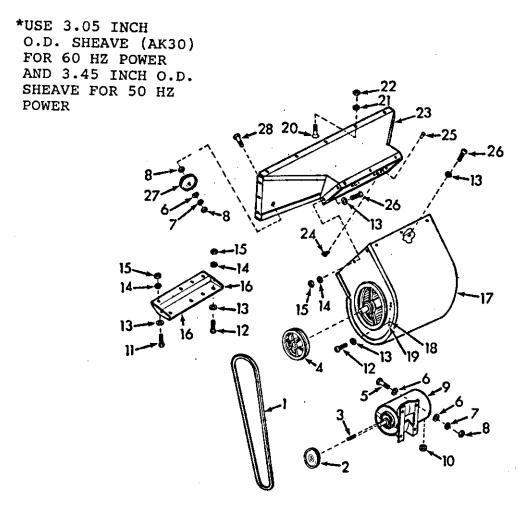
Conditioned Air Fan, Motor (B1) and Belt Drive
